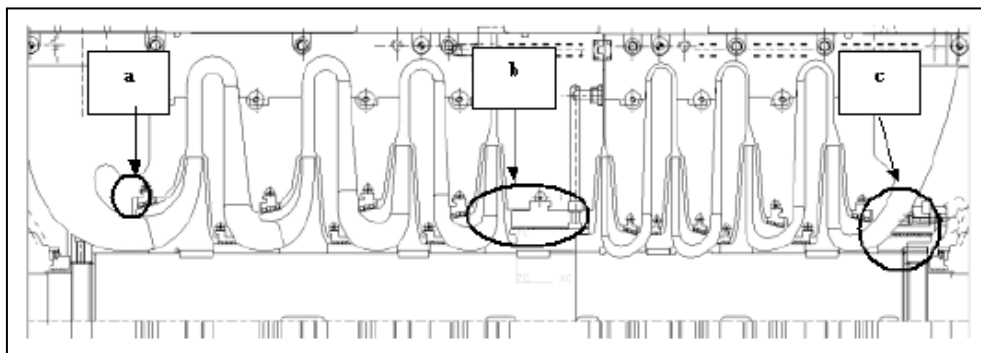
13 B-B compressor casing cross sectional , a) impeller shroud seal, b) Honeycomb interstage seal, c) abrasible seal [20]
